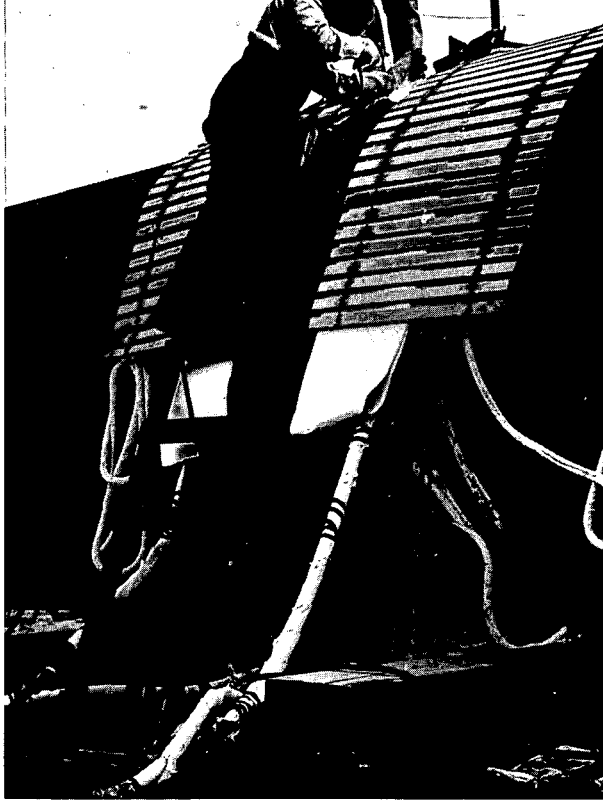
One 500,000 circular mil cable provides preheat for welding
